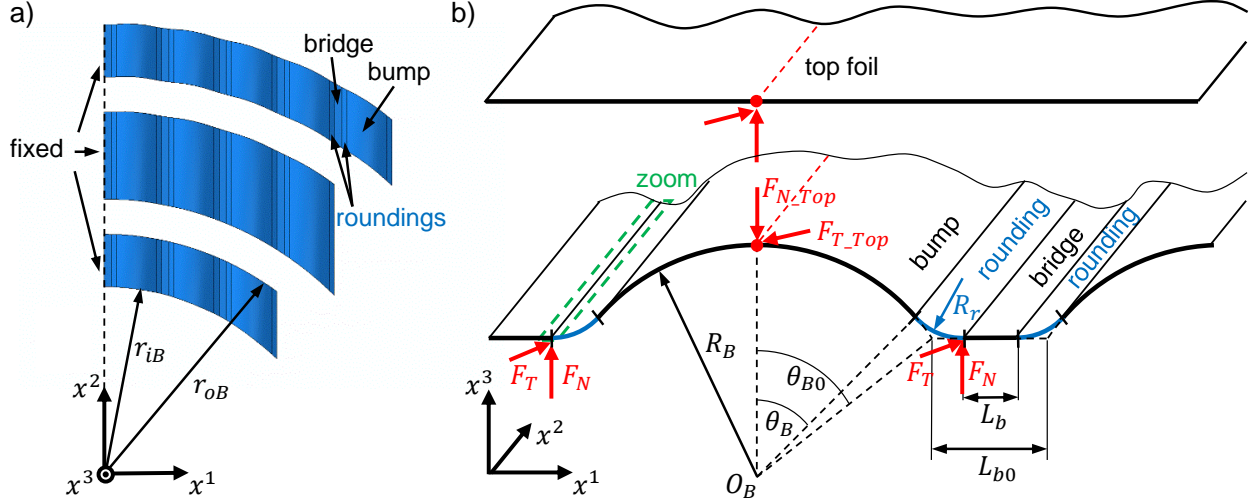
a) Two-dimensional bump strip geometry. b) Cut view through a bump strip parallel to the x^1, x^3 -plane.
